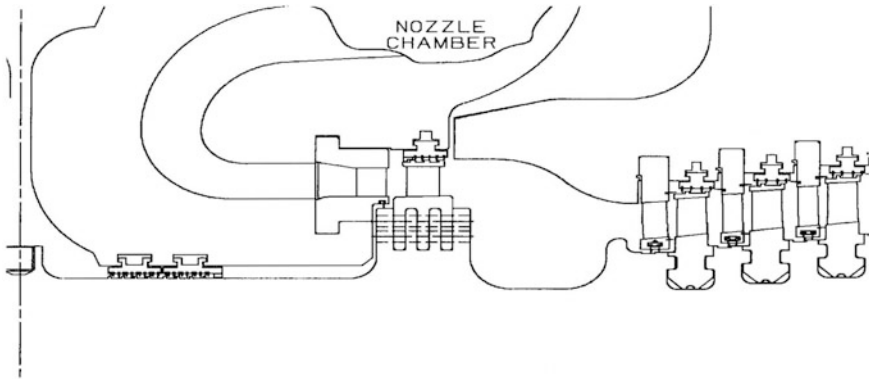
Seal areas shown for a HP rotor control stage (Courtesy of Siemens)
